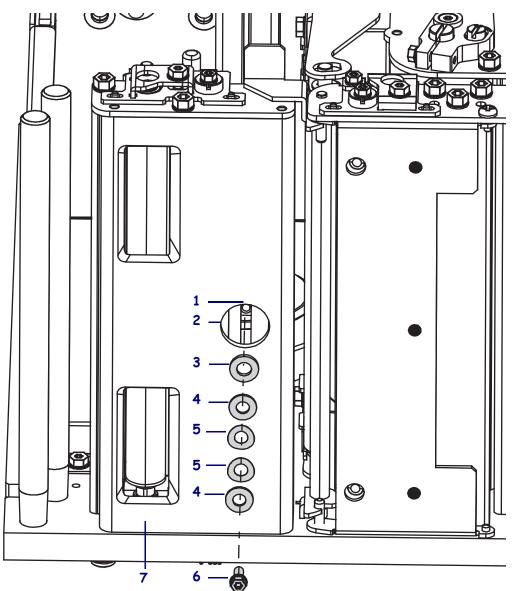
• Outboard Media Guide (Shown from Underside of Print Engine)
